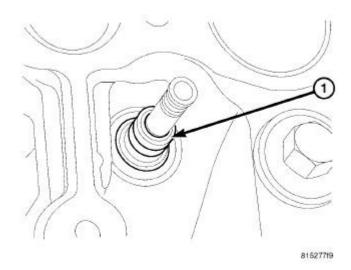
Valve Seal Courtesy of CHRYSLER LLC
